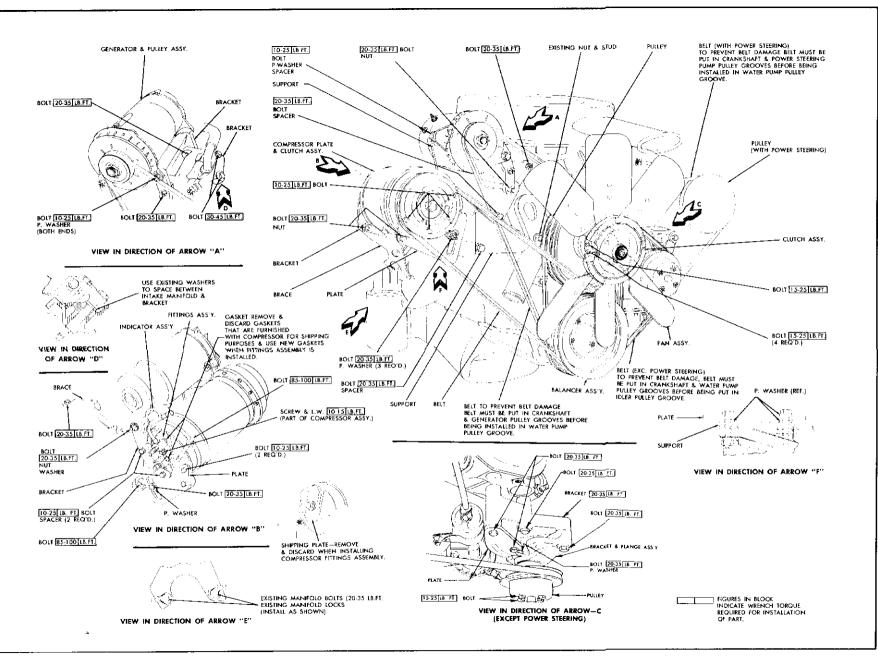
Reference Illustration—Circ-L-Aire Conditioner Engine Parts
